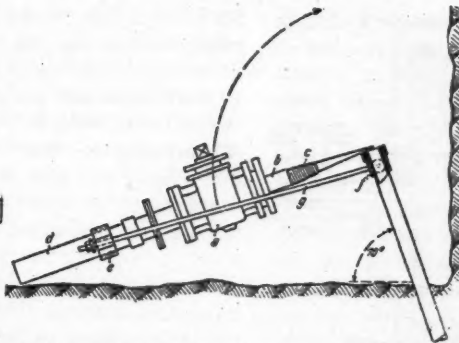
TAP AND PLUG READY FOR SWINGING.
